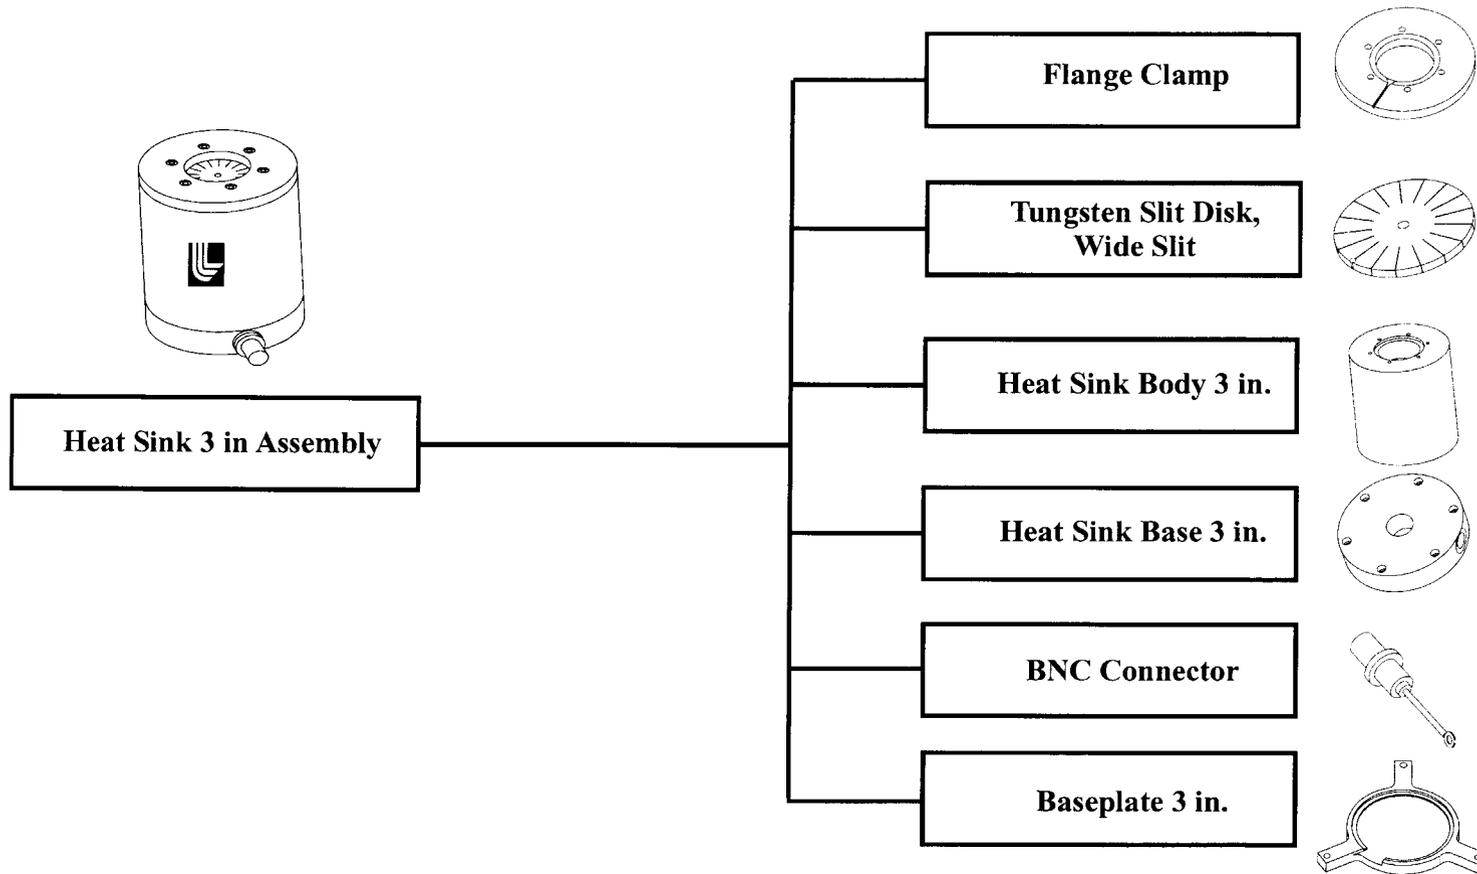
Exploded view of the components in the Heat Sink Sub-Assembly.
